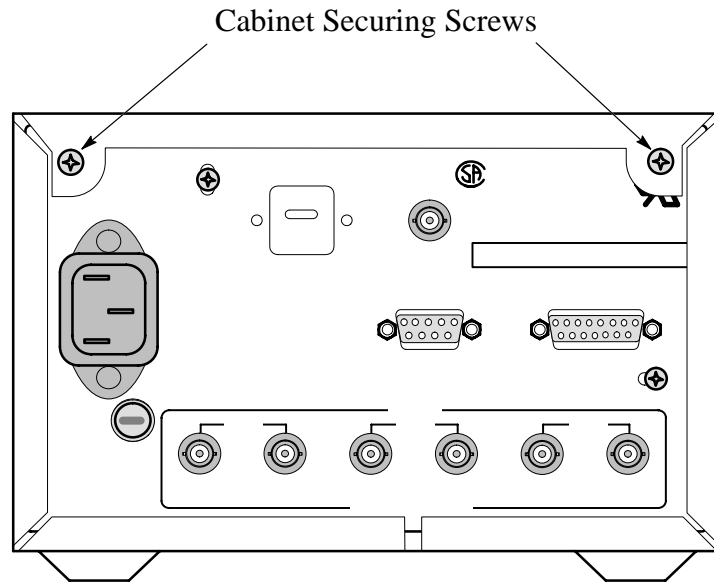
Rear view of the instrument, shown in the cabinet, with the securing screws identified
